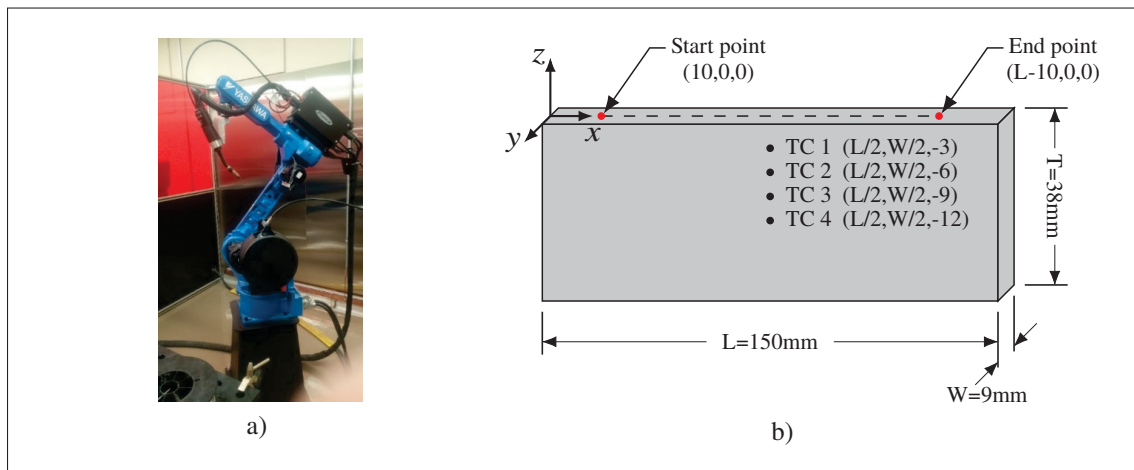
a) Experimental setup b) Sample dimensions, weld line and thermocouple locations
